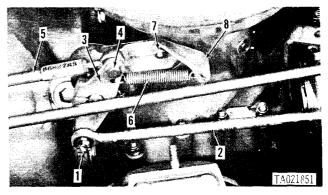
Removing or installing fuel shut-off rod, model AVDS-1790-2DR engine.
